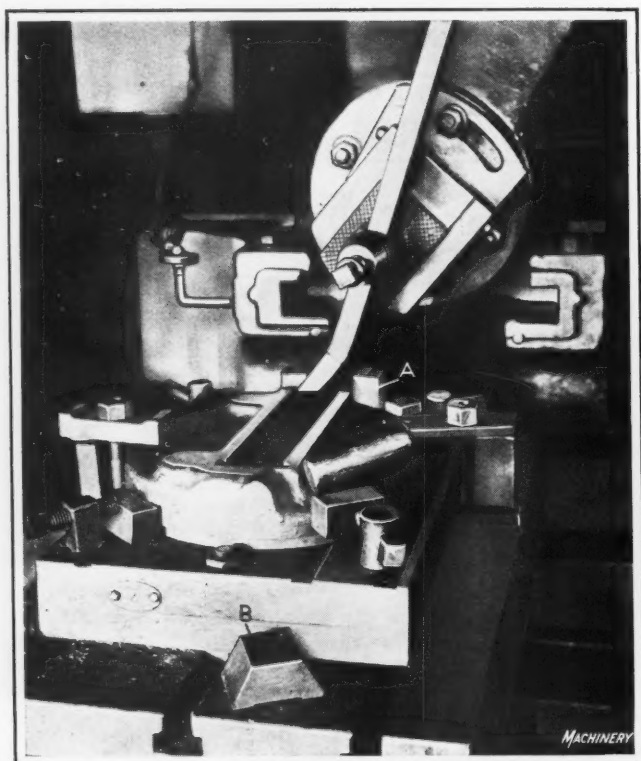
A 24-inch Shaper equipped for planing the Dovetail Bearing and the Horizontal Face of Front Plates for Planer Frictions
